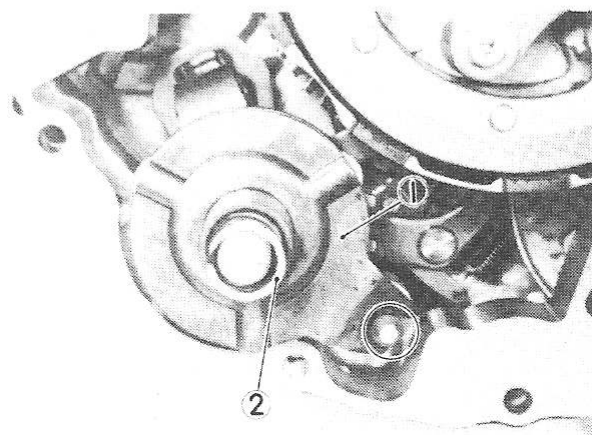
B.34 The number 1 shift guide must engage with the crankcase post (circled) before the spring (2) is installed (Sec 19)
